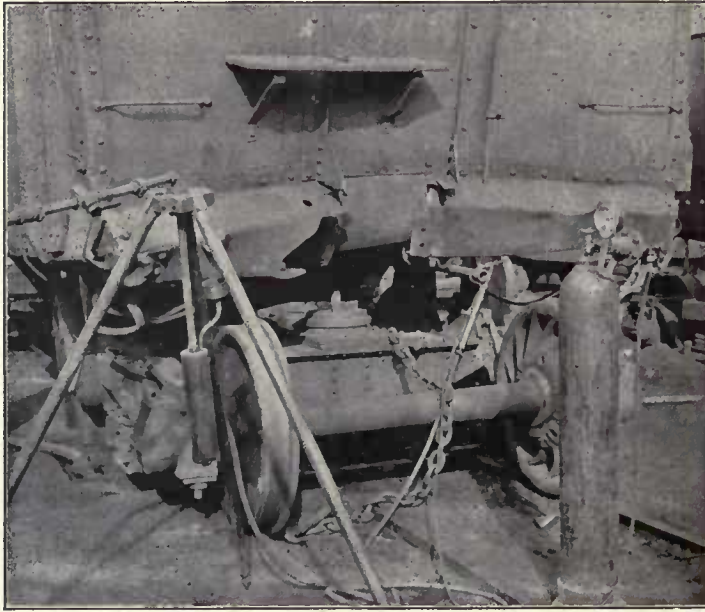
Oxygen Tank, Torch, Etc., Used with Oxy-Acetylene Cutting Apparatus.
